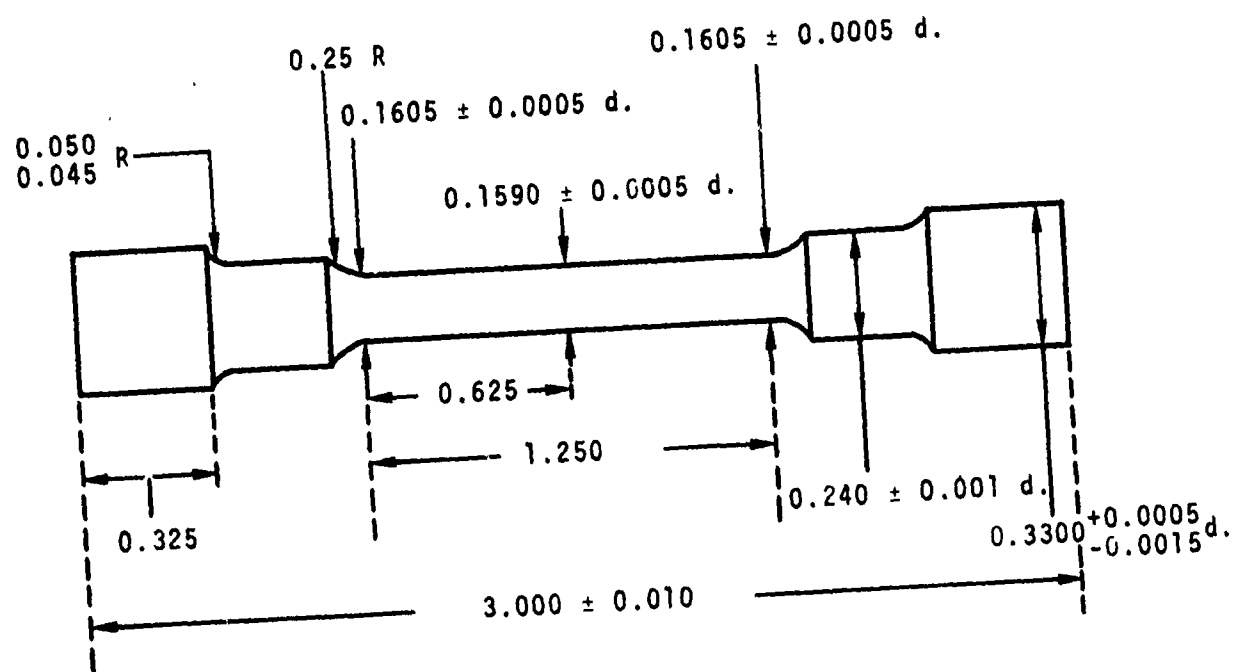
Button Head Tensile Specimen with Tapered Gage Section
